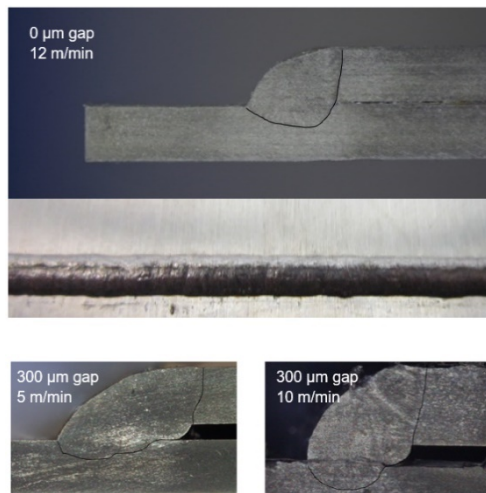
Fillet welding of AL6082 for an upper sheet thickness of 1mm using the beam shaping technique BrightLine Weld. A gap of 300 μm could be bridged up to welding speeds of 10 m/min.
